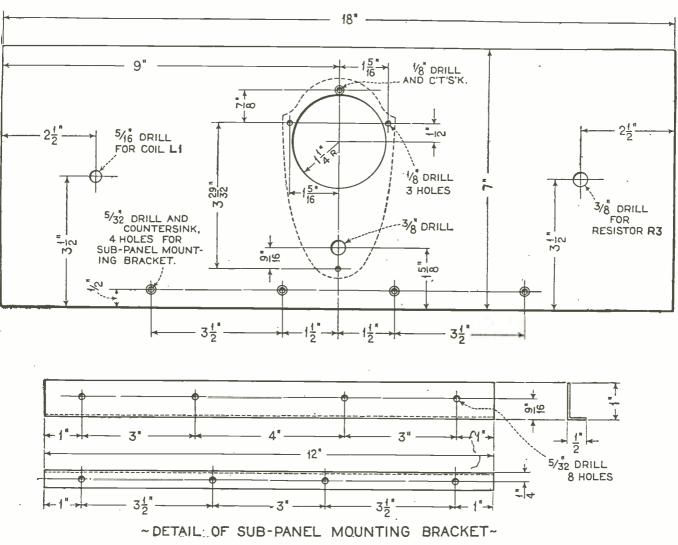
THE DIMENSIONS OF THE PANEL MOUNTING BRACKET AND THE MAIN PANEL SHOULD BE CAREFULLY OBSERVED IN TRANSFERRING THE LAYOUT TO THE PANEL SO THAT THERE WILL BE NO CHANCE FOR ERROR
